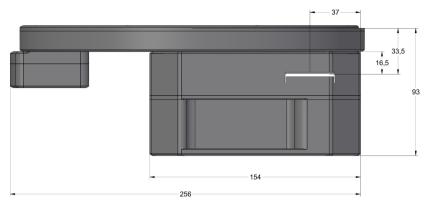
G4 camera head with enhanced cooling and "L" size external filter wheel side view
